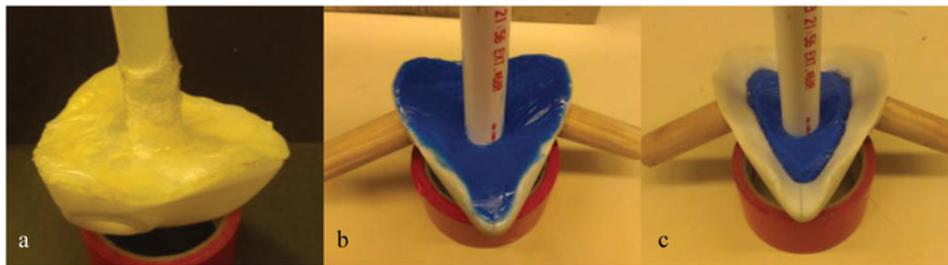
Casting male mold (a: epoxy backing plate; b: untrimmed; c: trimmed of excess silicone to expose sealing edge). (color figure available online).
